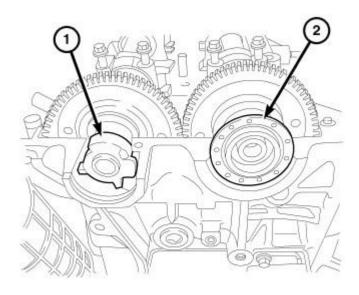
CAMSHAFT OIL SEAL Courtesy of CHRYSLER LLC
